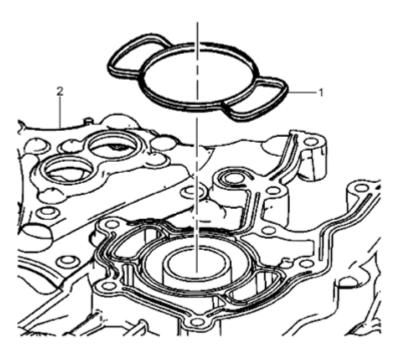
Removing Crankshaft Oil Seal From Timing Chain Cover Courtesy of SUZUKI OF AMERICA CORP.
